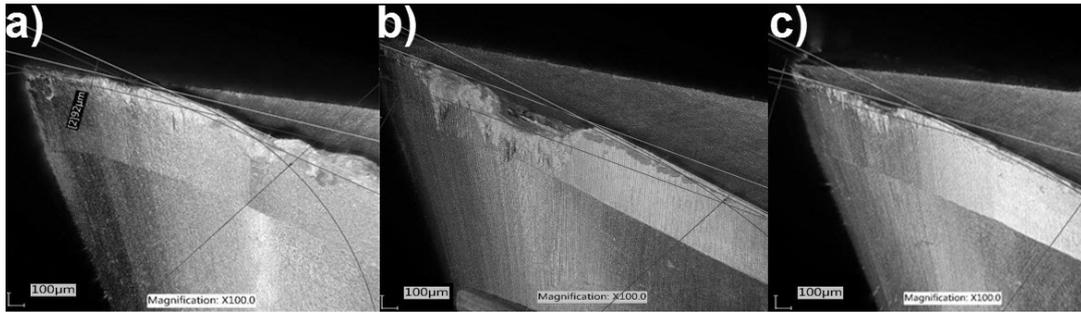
Cutters blades after finishing the tests : a) milling cutter 1 - 5275.501nn, b) milling cutter 2 – C5275, c) milling cutter 3 – U5275
